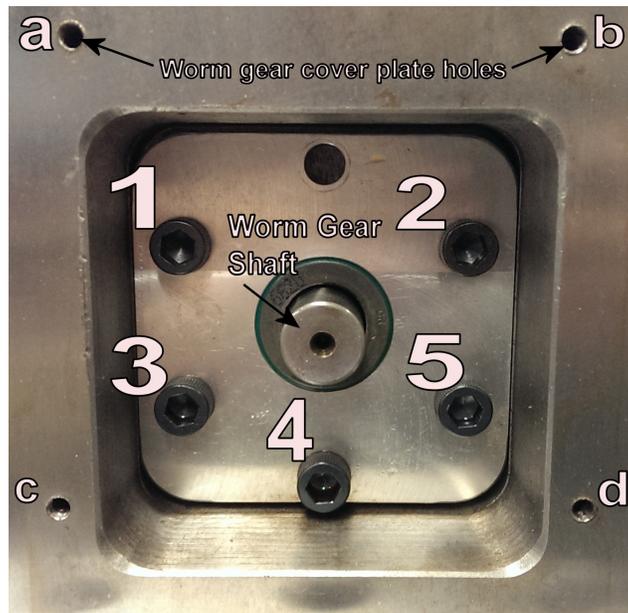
Holes a, b, c, & d cover the worm gear shaft. Screws 1, 2, 3, 4 & 5 hold worm gear shaft in place.
